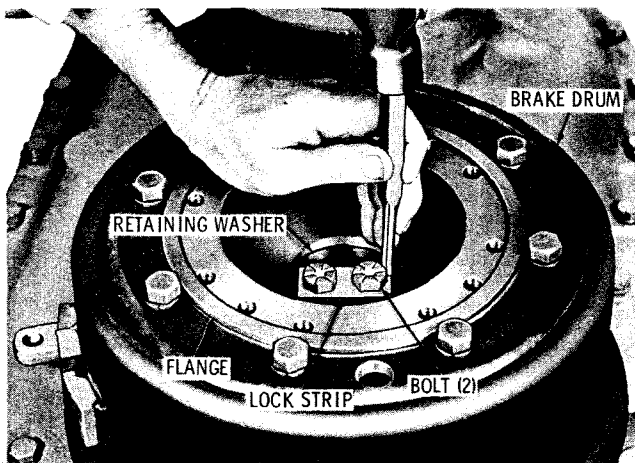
Flattening lock strip which retains rear output flange bolts
